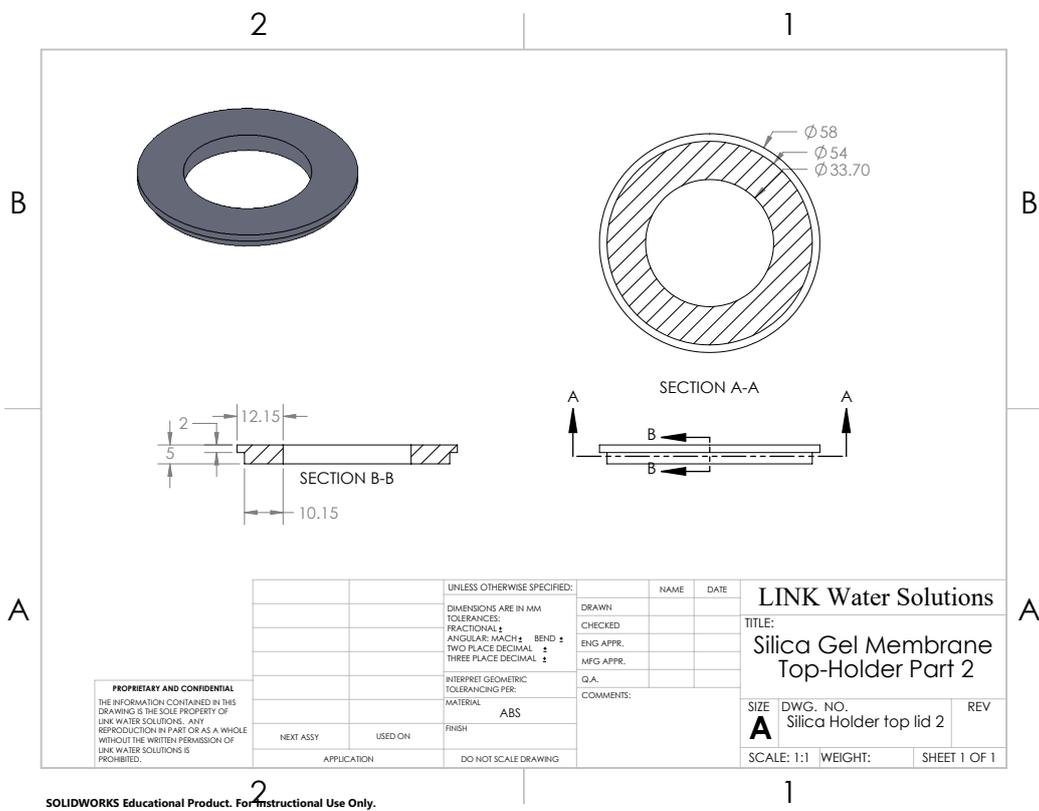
Technical drawing of the top lid of membrane holder of the silica gel holder: Part 2
